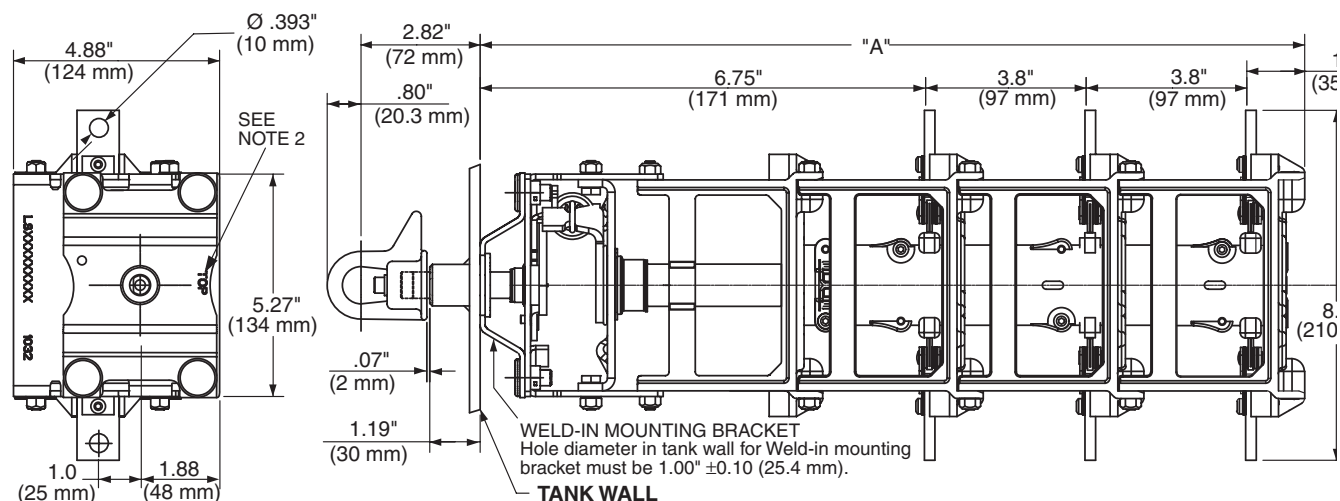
Line Illustration with dimensions of loadbreak switch with "Weld-in System" for horizontal or vertical mounting.
